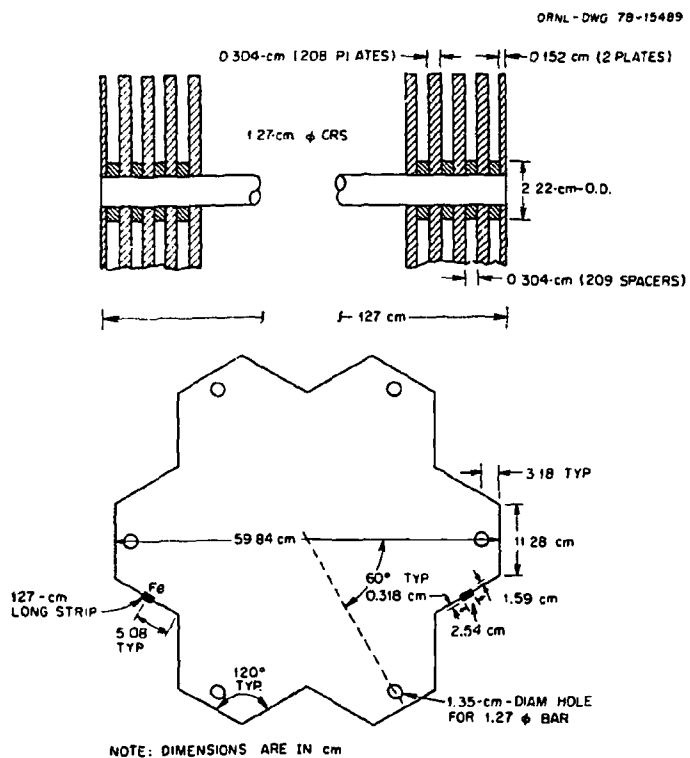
Schematic of the homogeneous Fe-plate assembly.
